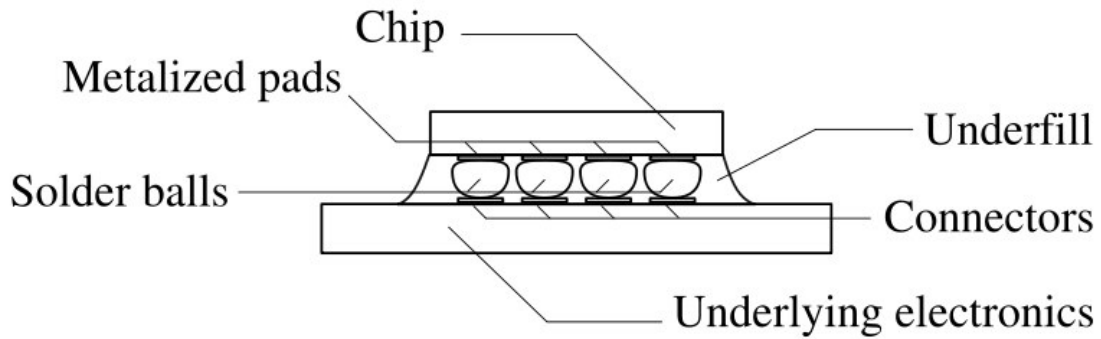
Cross section schematic of a typical flip chip mounting (from Wikipedia).
